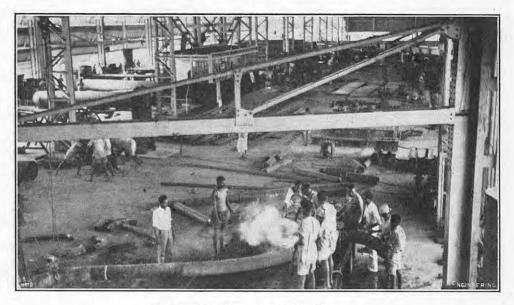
HOT-BENDING A 9-IN. SPECIAL.
